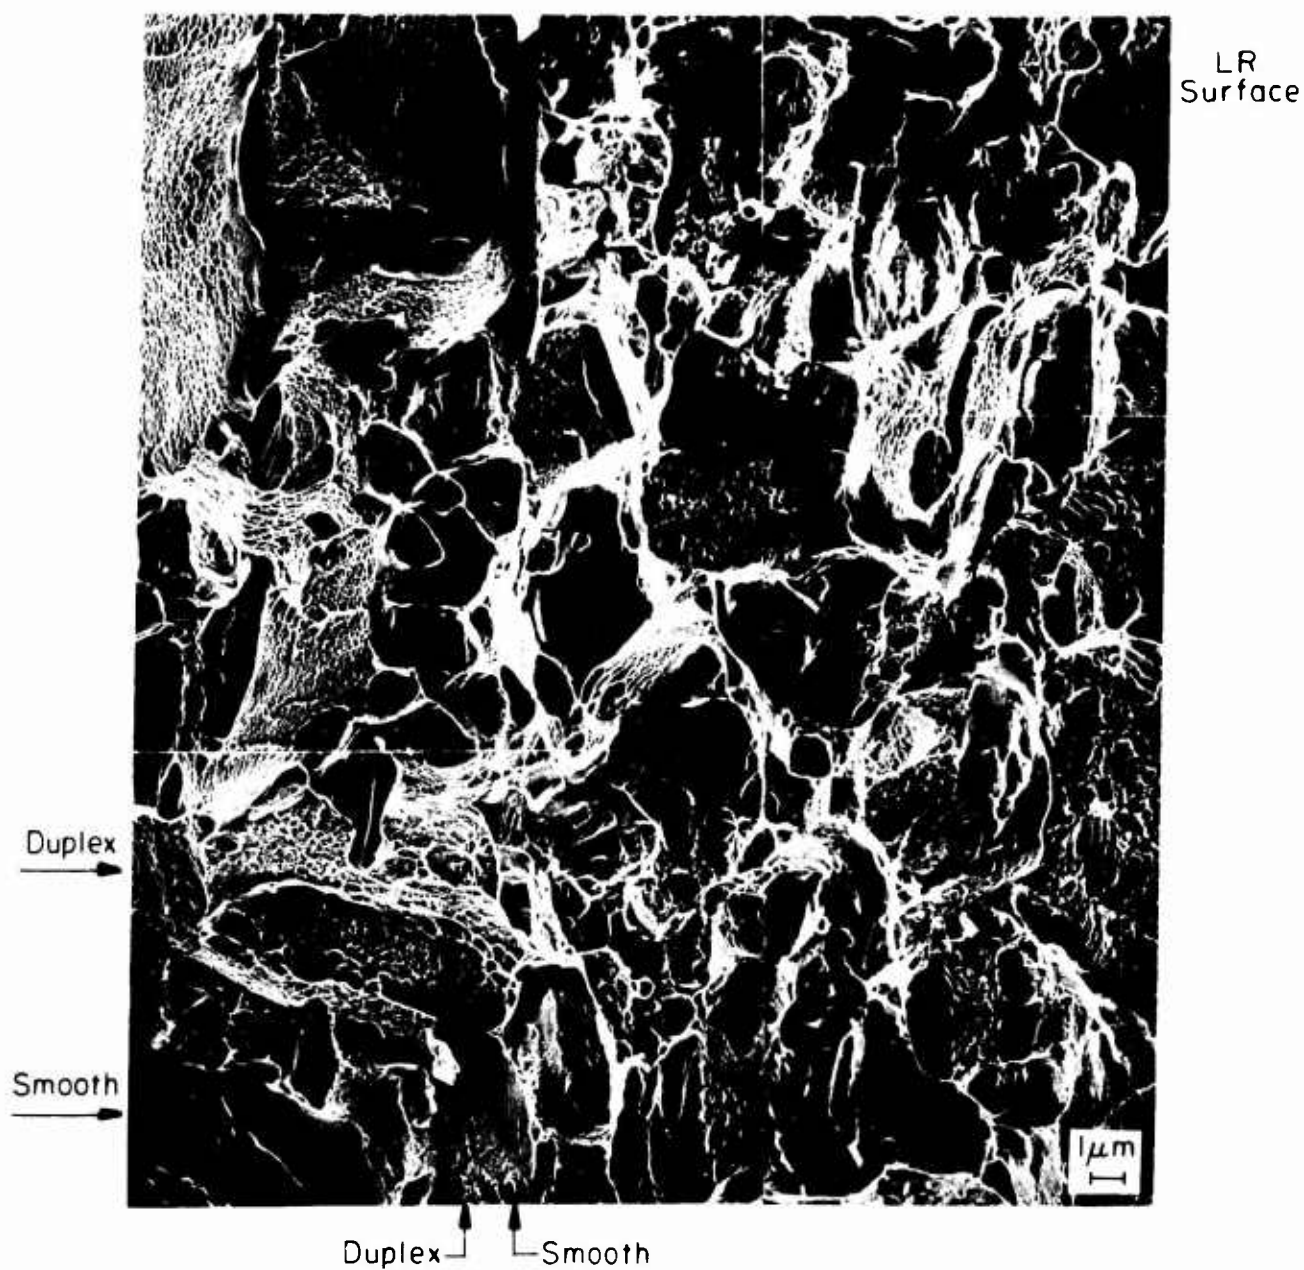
Alloy 227, sample 4MT7. SEM of fracture surface X375. Note indicated dimpled (d) and smooth (S) regions shown at higher magnification in the preceding figure.
